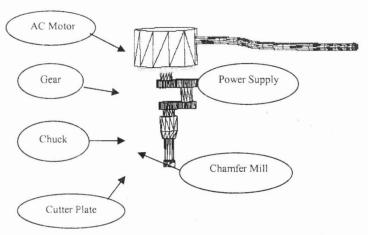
Drawing of Components for Portable Steel's Chamfer Machine
